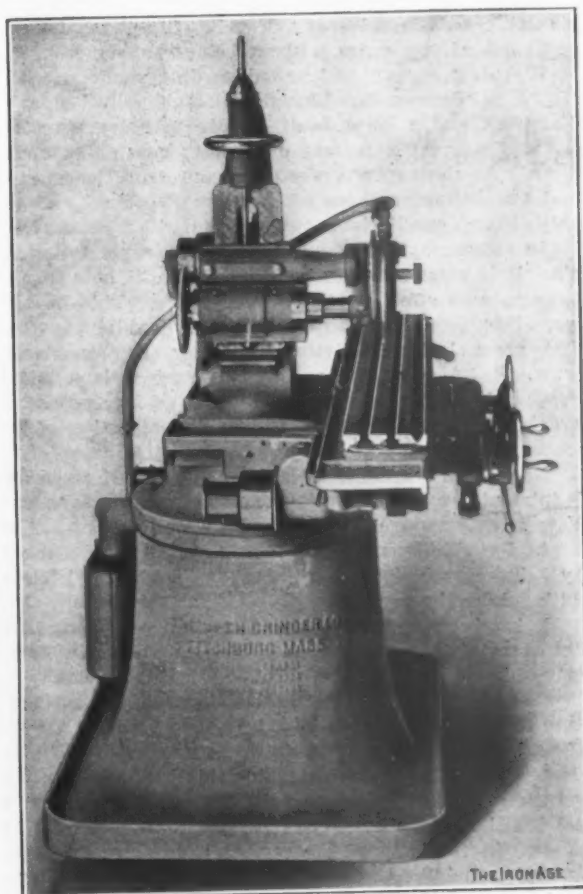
The Bath Universal Grinder as Commonly Set for Surface Grinding.
